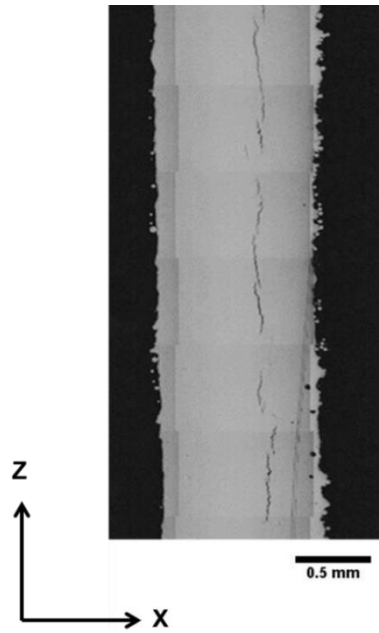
Optical image of cracking in 1 mm thick wall built with 20 μm layer thickness.
